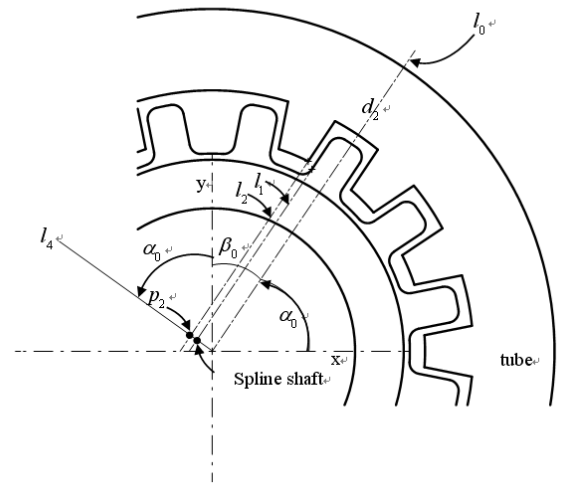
Assembly of spline shaft and tube<sup>1</sup>
